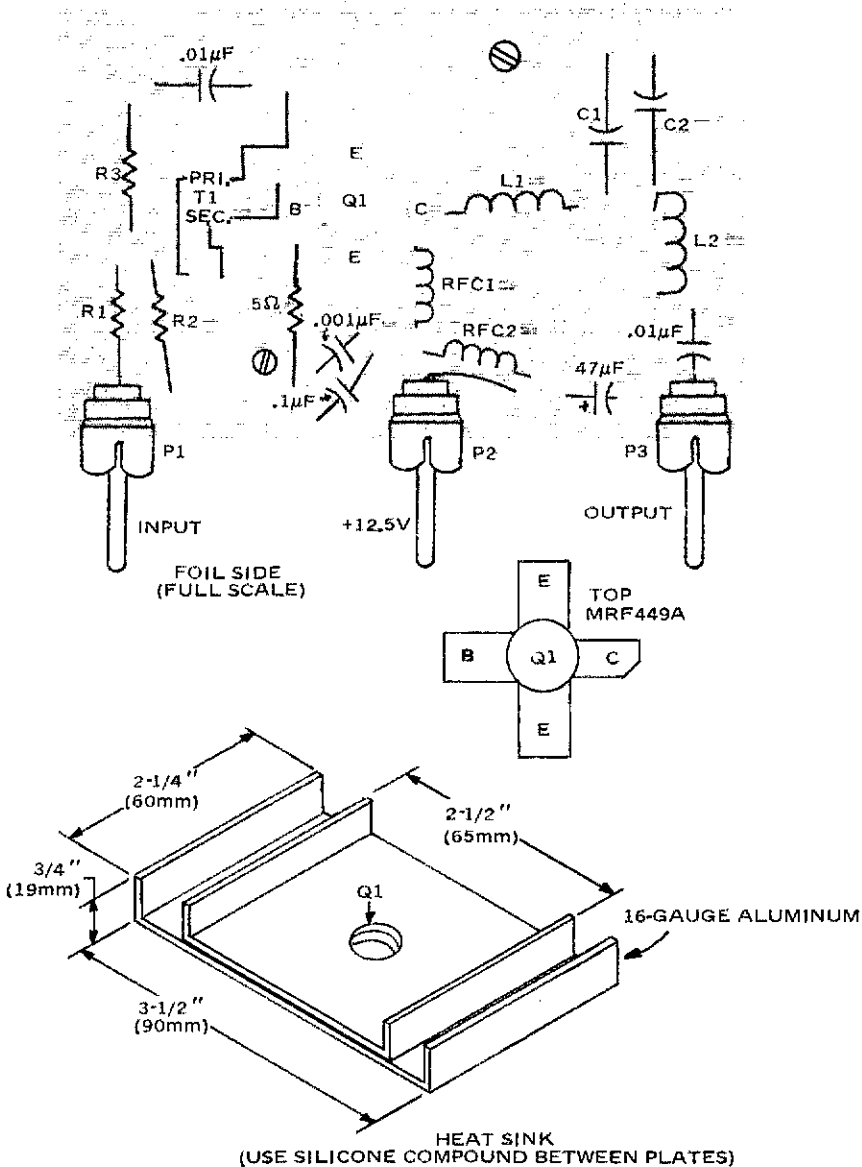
Scale layout of the pc board. Heat-sink dimensions are given in English and metric. The heat sink is held to the double-clad pc board by means of the transistor stud and two 4-40 screws and nuts. A substantially larger heat sink should be used if the amplifier is revised for 30 watts of output.
